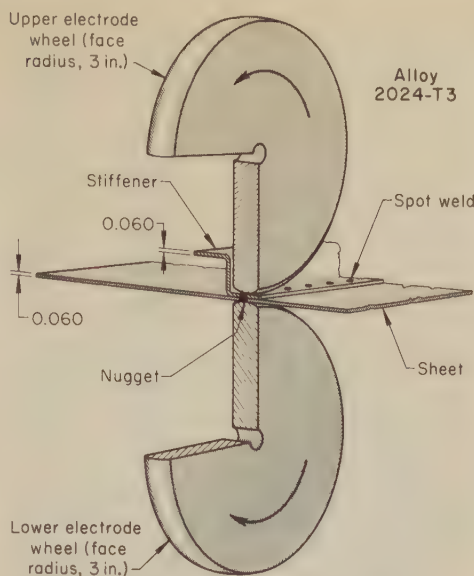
Roll resistance spot welding of a Z-section longitudinal stiffener to a sheet, using intermittent electrode motion, a welding force and a forging force
